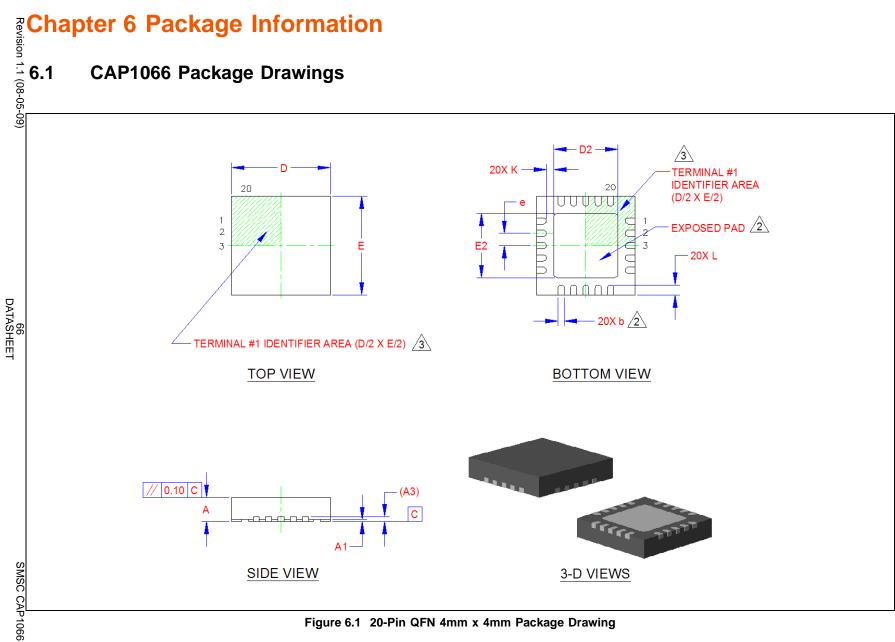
20-Pin QFN 4mm x 4mm Package Drawing
